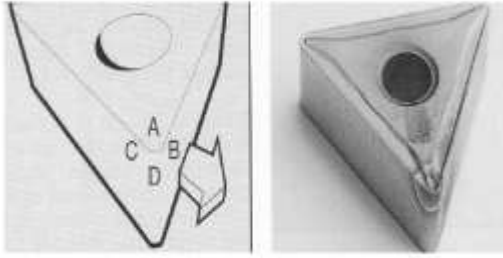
Wear zones on the cutting tool caused by chip formation [6]
